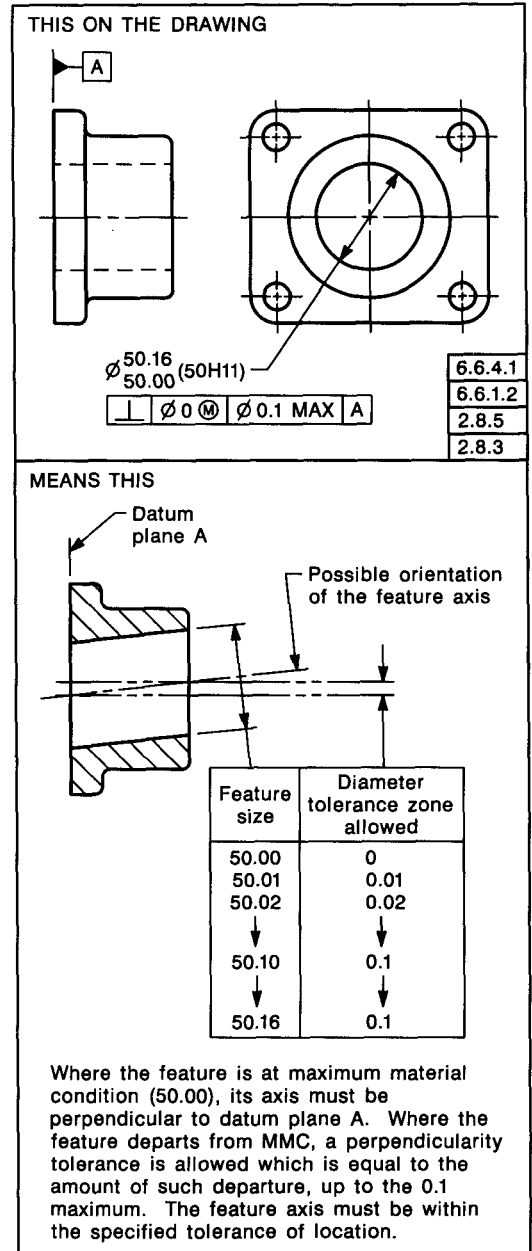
SPECIFYING PERPENDICULARITY FOR AN AXIS (ZERO TOLERANCE AT MMC WITH A MAXIMUM SPECIFIED)
